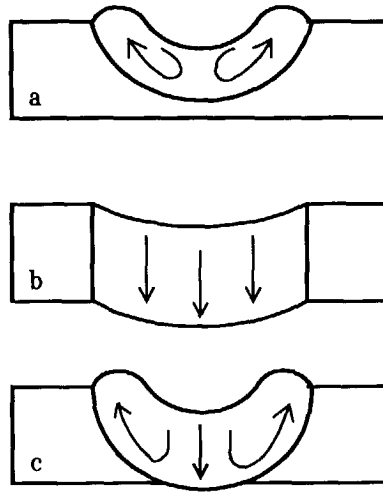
Schematic illustration of liquid motion in weld pools of different geometry.
